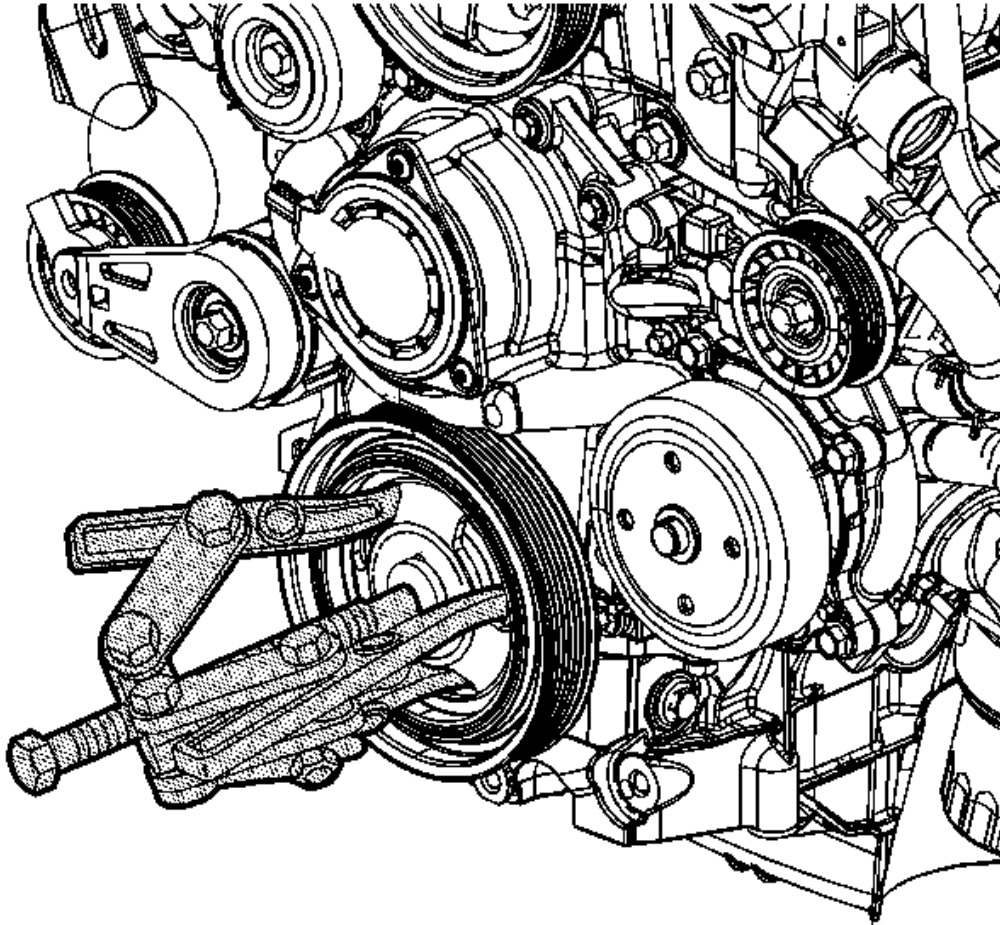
Identifying Crankshaft Balancer Removing Tool J 41816
